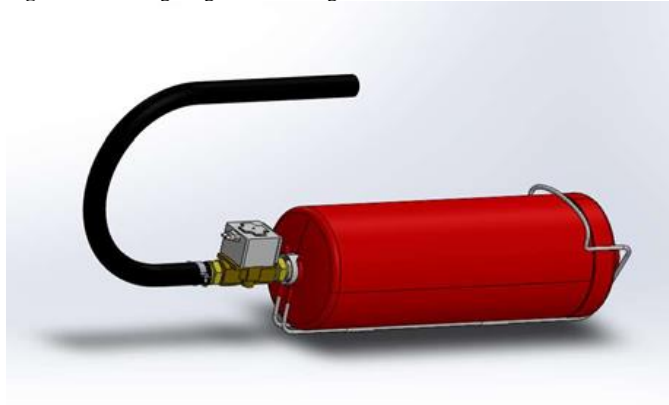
CO2 extinguisher, Bracket, electric valve and pipe assembly.
